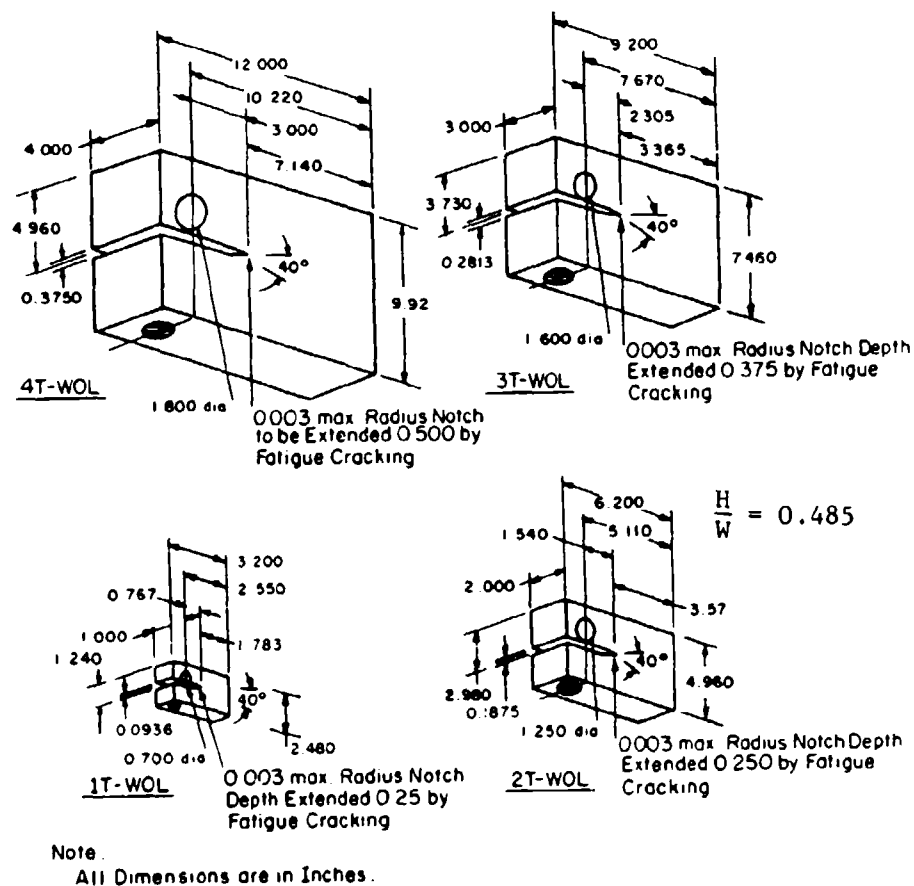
Dimensions of Several T Type Wedge Opening Load (WOL) Specimens.
